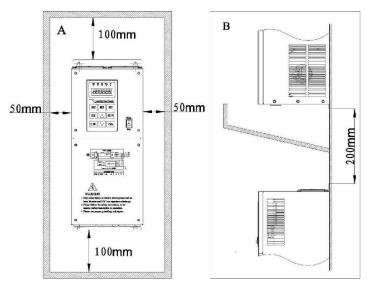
Retaining space requirements for each device up, down, left, and right
